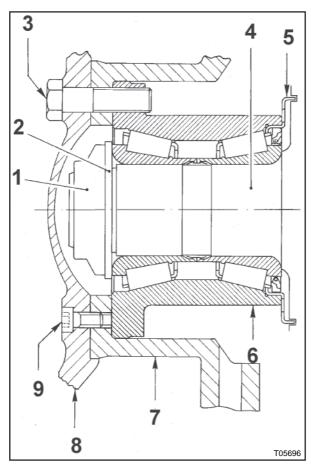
Unitized hub bearing set-up (front and tag axle installation)
